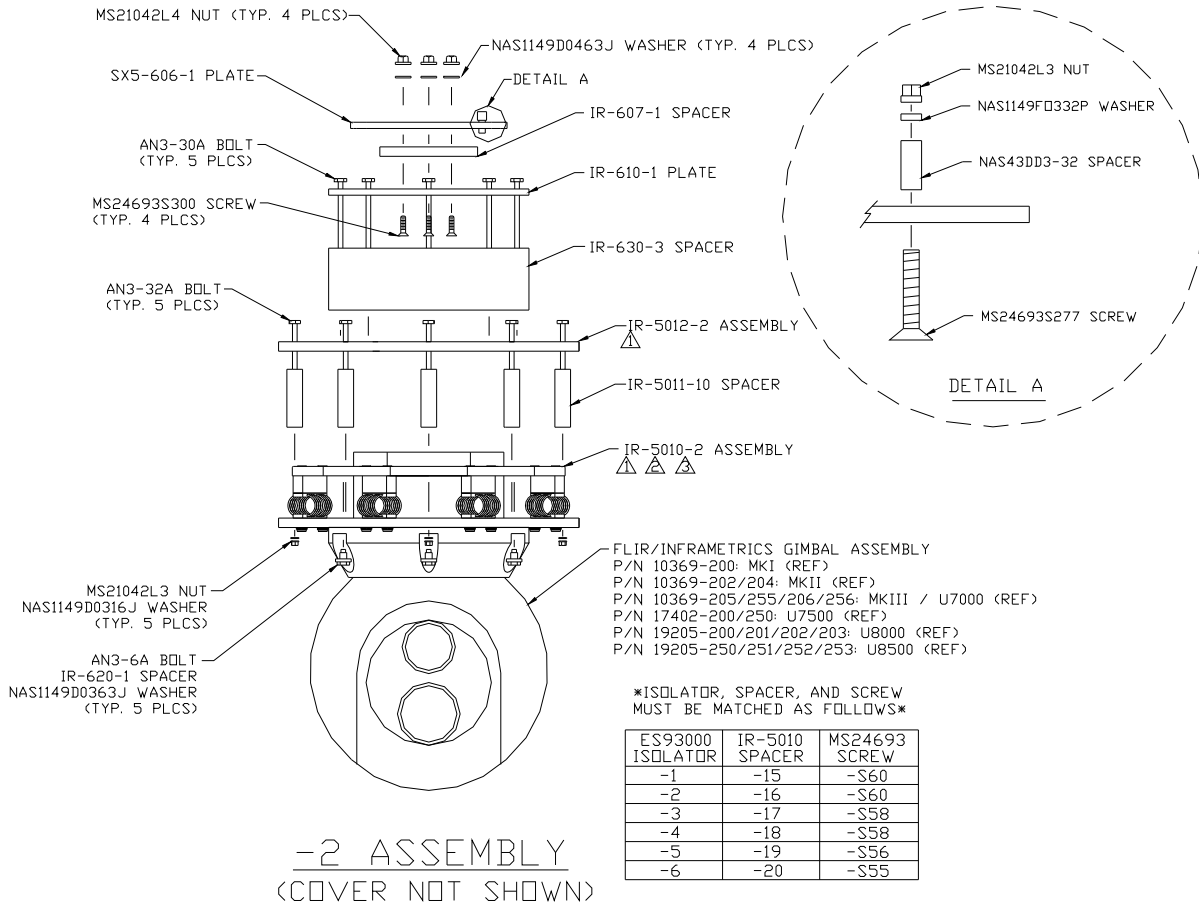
IR-420-2 Gimbal Adapter Assembly (NO parts list next page)
